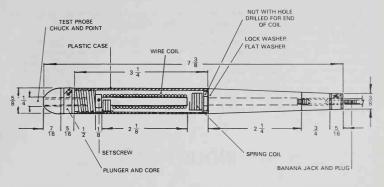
Schematic showing construction of a practical electrical pencil.
